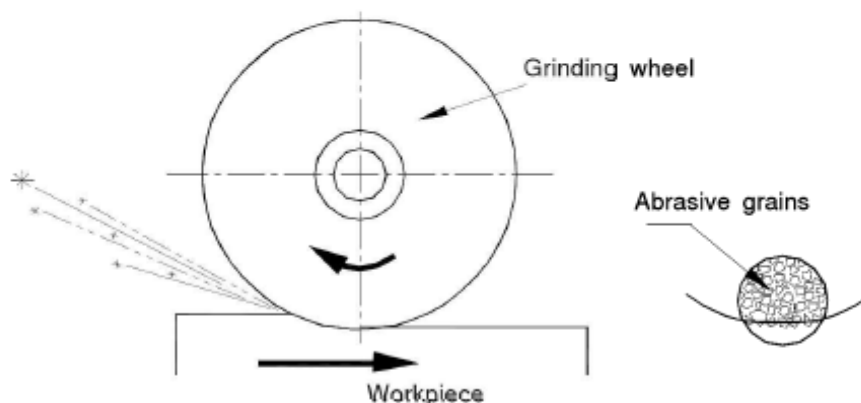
The grinding process and an enlarged view of a grinding wheel.
